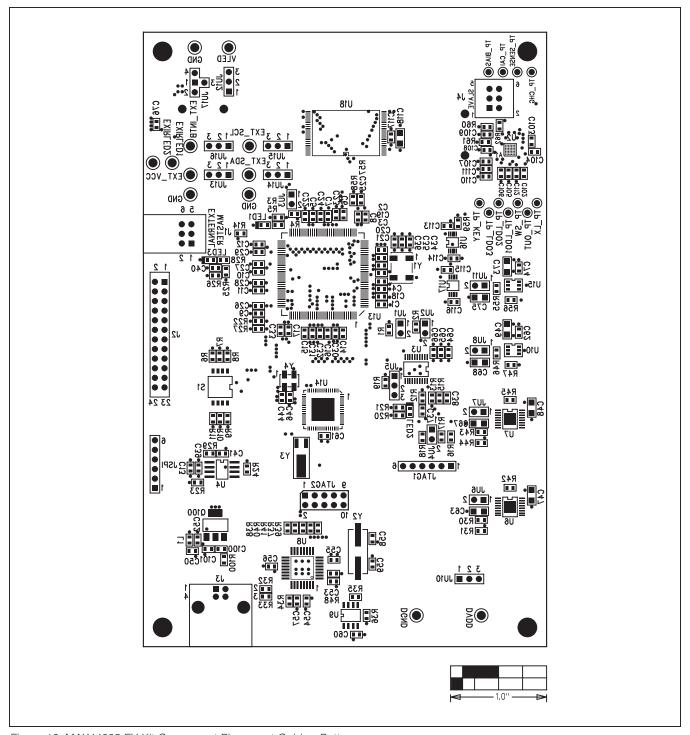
MAX44005 EV Kit Component Placement Guide—Bottom
